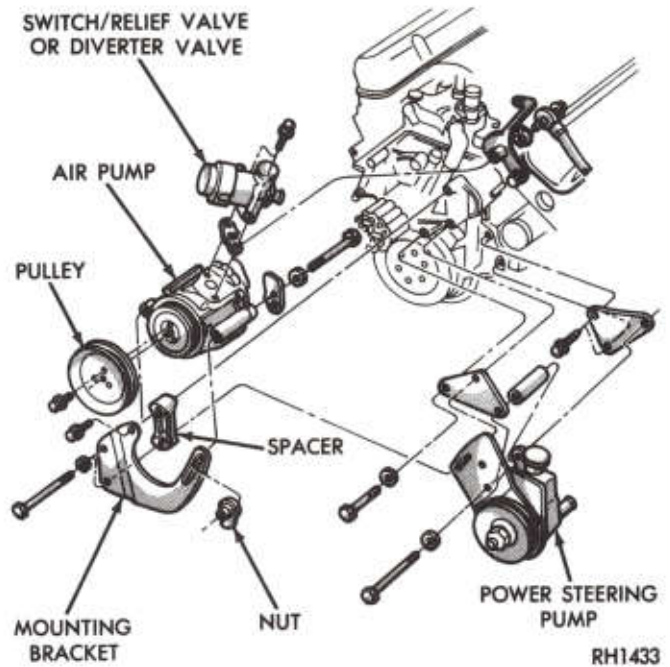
Air Pump Mounting 3.9L, 5.2L, and 5.9L
